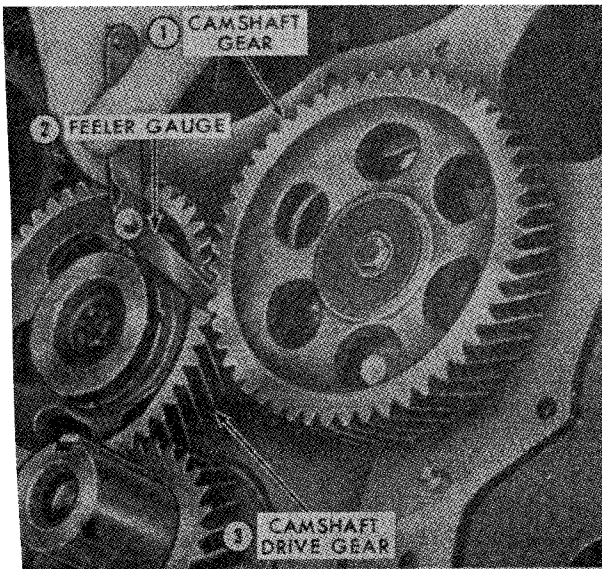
Checking camshaft drive (idler) gear to camshaft gear backlash with feeler gage.
